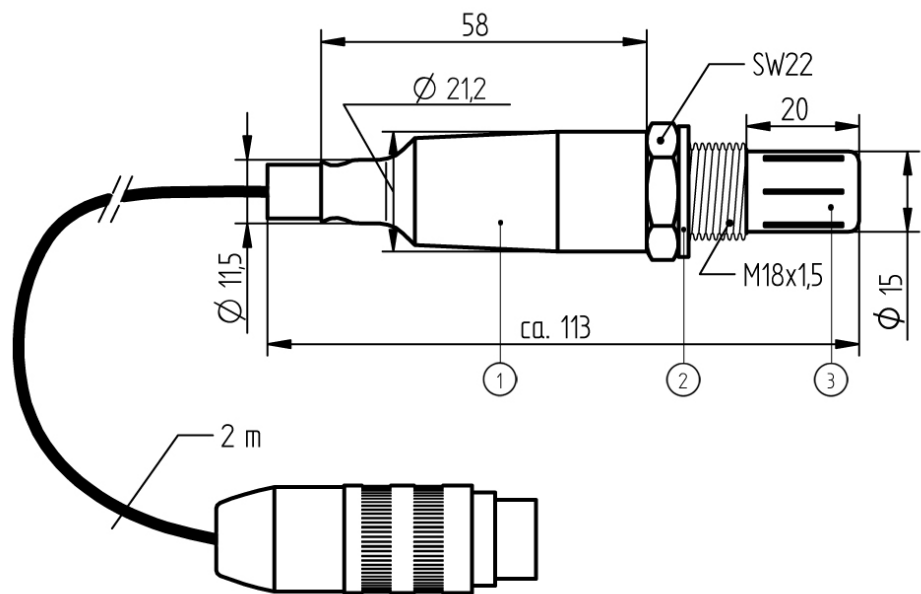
Dimensional drawing KS1 combination probe without housing
